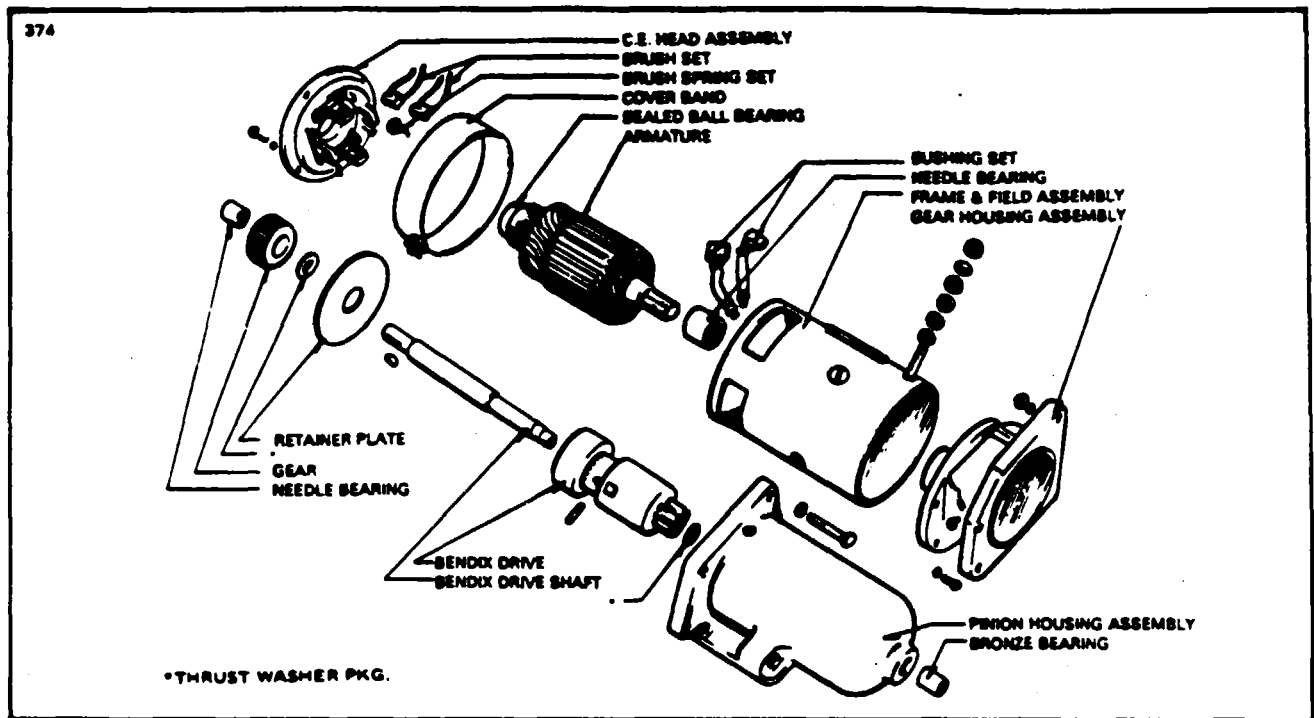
Exploded View of Gear Reduction Starting Motor
